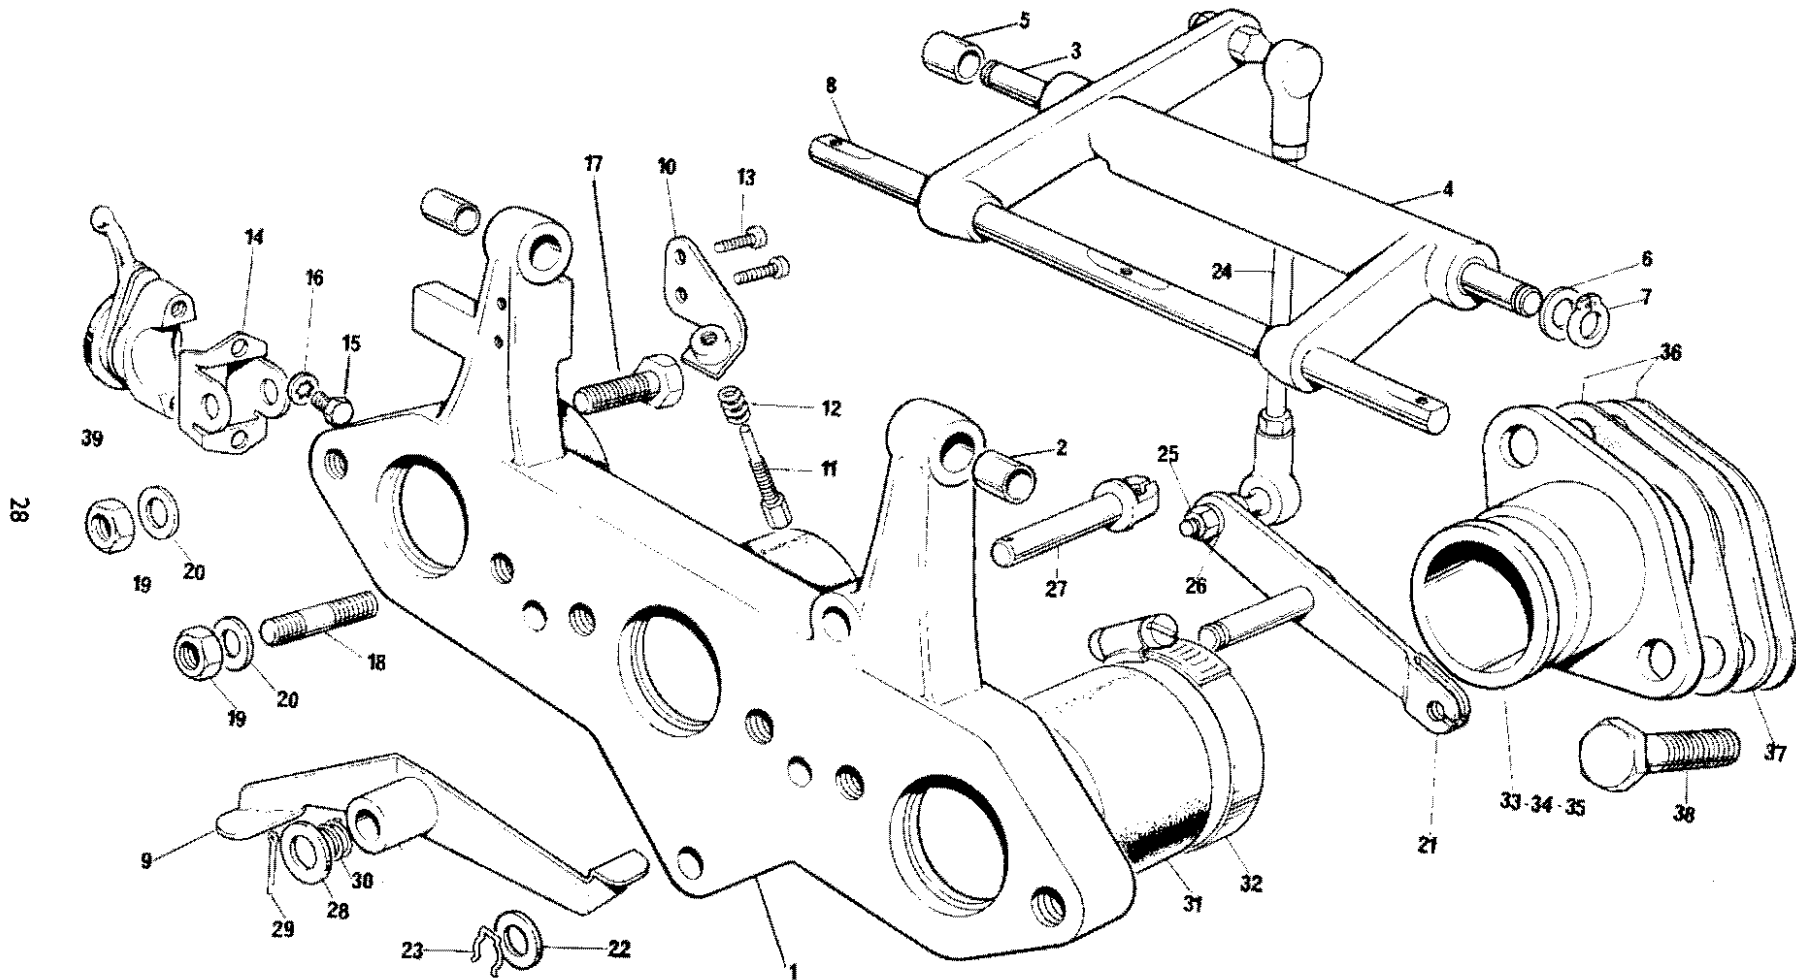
CARBURETOR ADAPTOR AND THROTTLE LINKAGE
